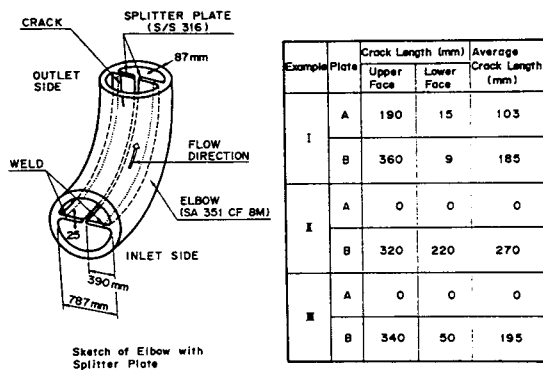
Fatigue crack initiated at toe of fillet welds joining splitter plate and elbow.
